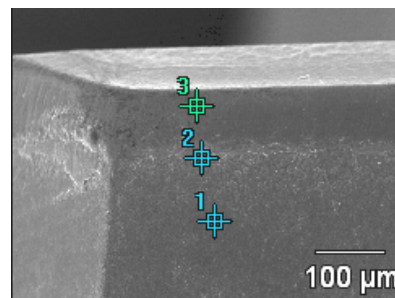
Ceramic tool cutting edge in the end of tool life - Workpiece 3 –MEV (20 kV)
